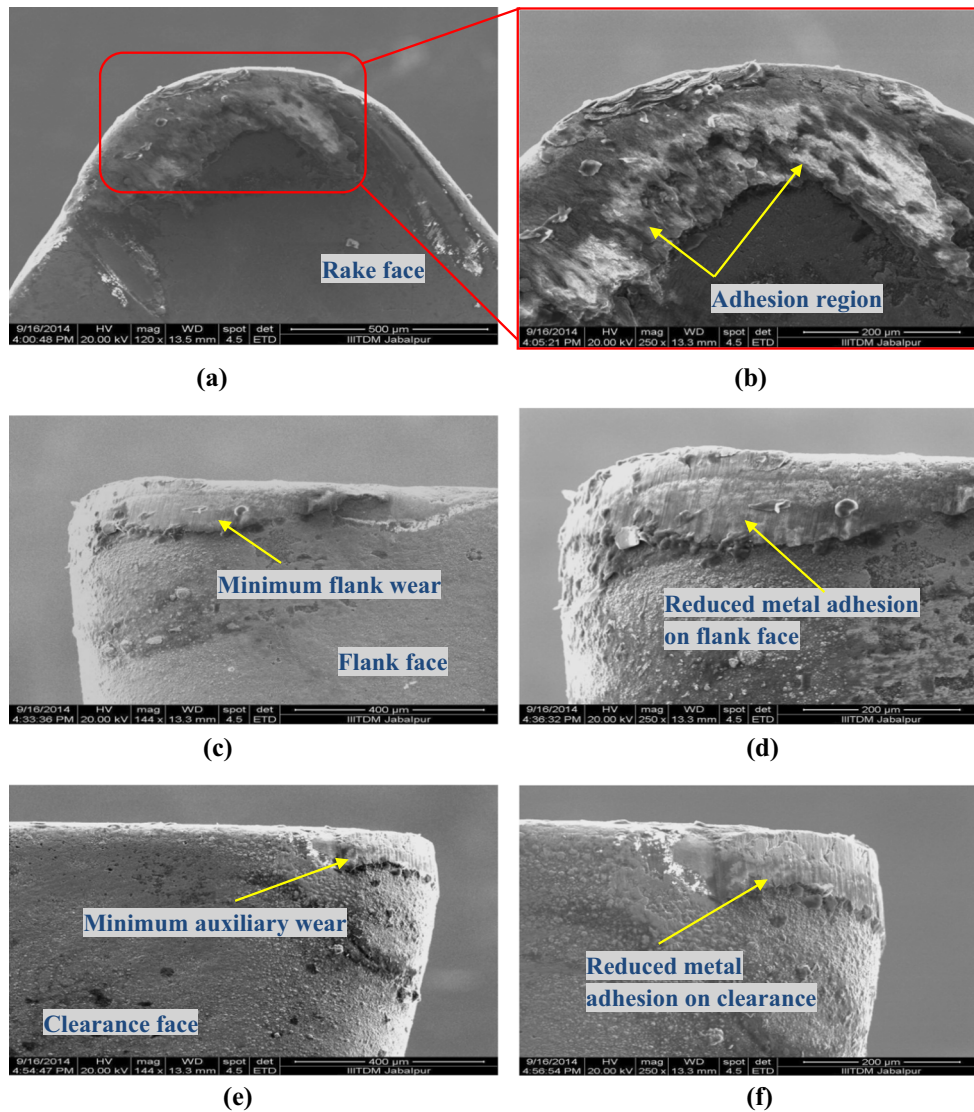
SEM views of worn-out insert under MQL by coconut oil cutting condition a crater wear, b close-up view of crater wear, c flank wear, d close-up view of flank wear, e auxiliary wear, f close-up view of auxiliary wear
